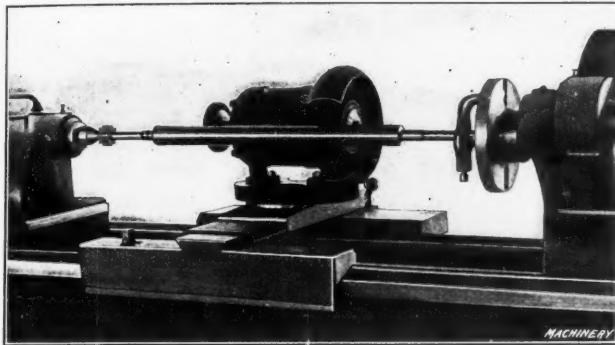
Forbes & Myers Grinding Attachment in use on External Work
